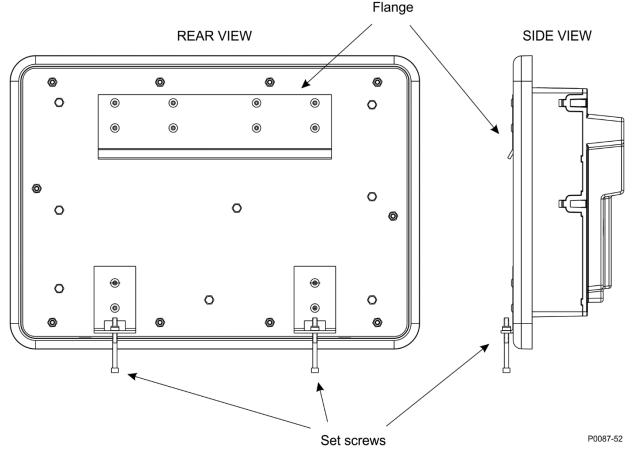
DIN Rail Flange and Setscrew Locations for Style xRxxxxxx
